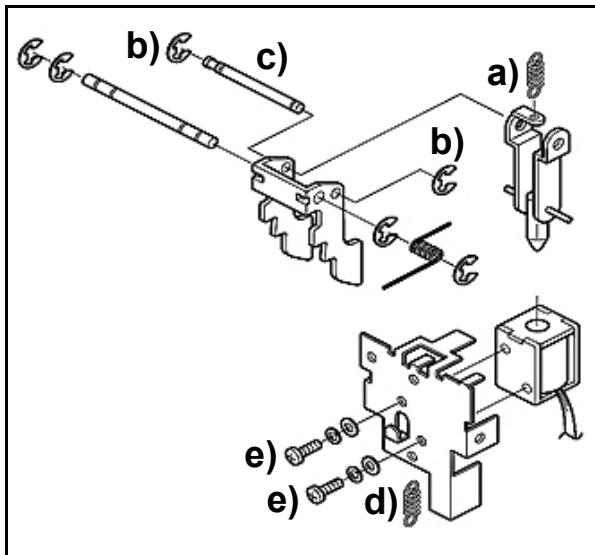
Complete Transport Solenoid Lever Assembly's Disassembly
